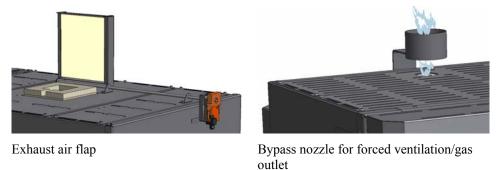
Exhaust air flap/bypass nozzles (similar to picture)
